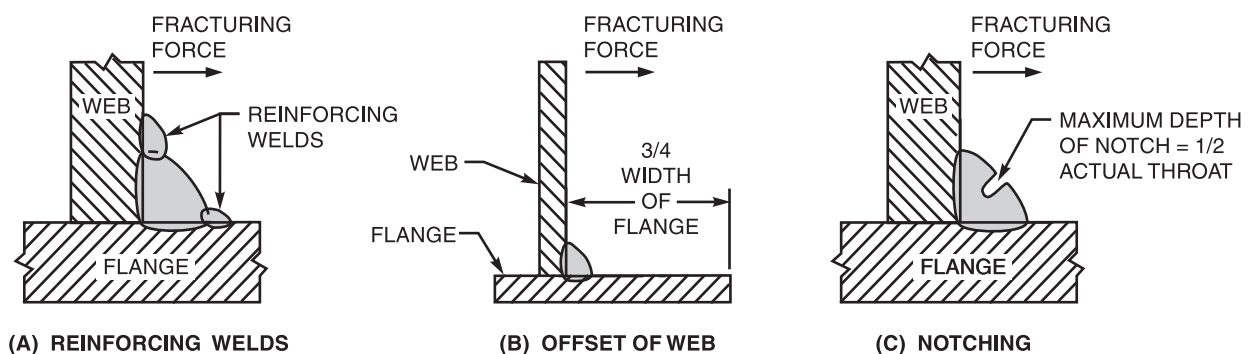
Alternative Methods for Facilitating Fracture of the Fillet Weld
